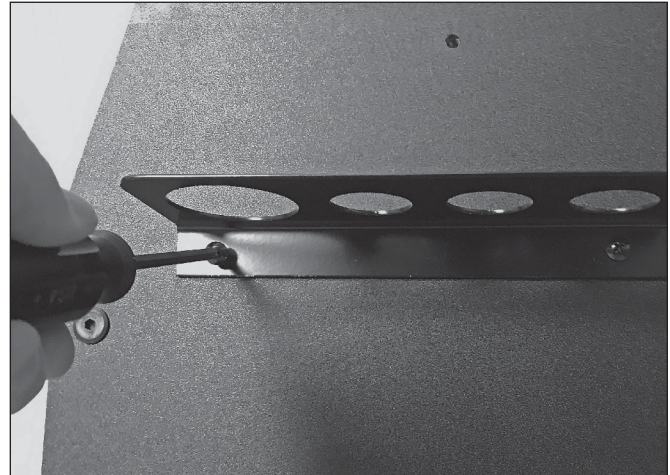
Install the eyepiece rack on the left side panel with the two small wood screws provided.
